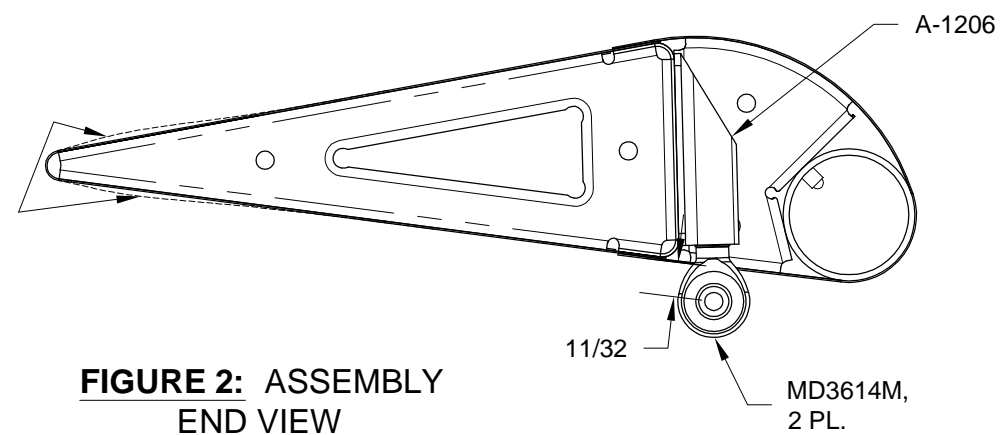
ASSEMBLY END VIEW (SOME PARTS NOT SHOWN FOR CLARITY)
